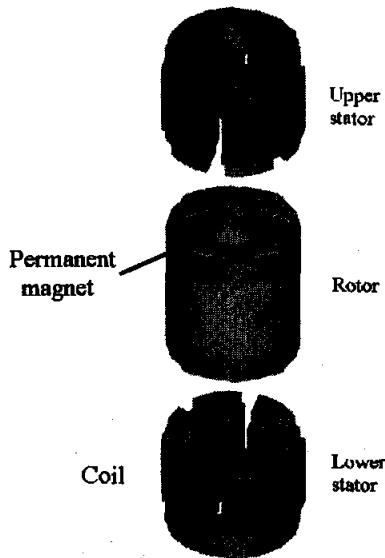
Schematic diagram of a bidirectional axial-type self-bearing motor
